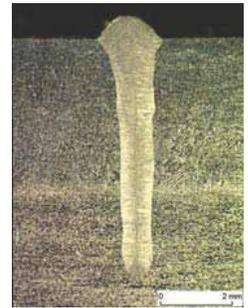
Bead on plate weld, stainless steel, P= 6.9 kW, v=2m/min, gas Argon
